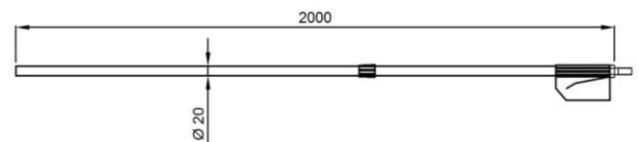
Compressed air conveyor tube; dimensions given in mm.
